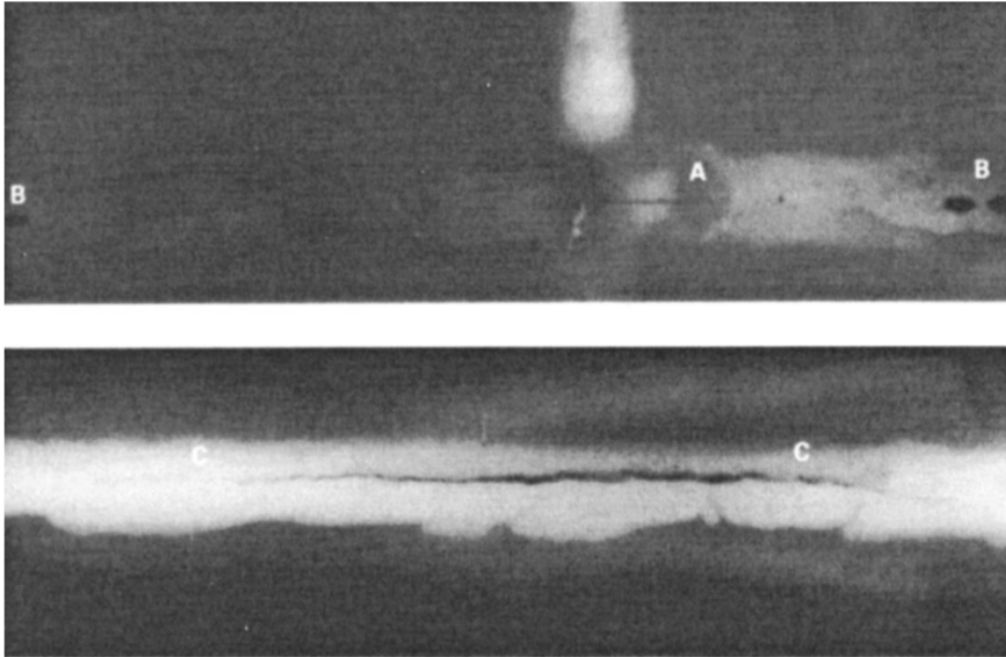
Radiography of a weld, identifying 4 problems [Halmshaw, 1996]:
